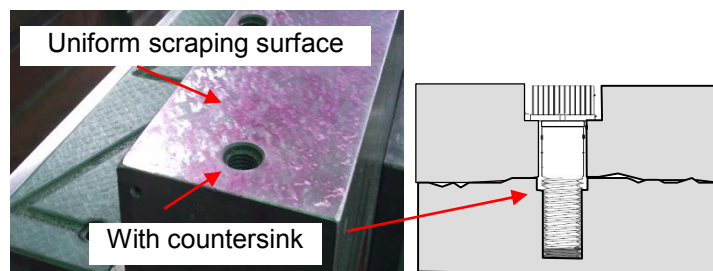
Rebuild the scraping surface and the countersink to get a stiffer joint.
